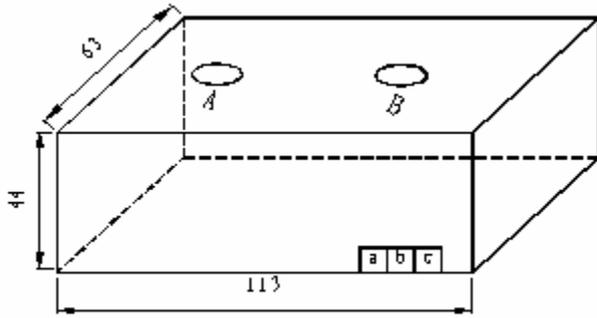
Structure dimensions of CT1 (φ36 through hole)
